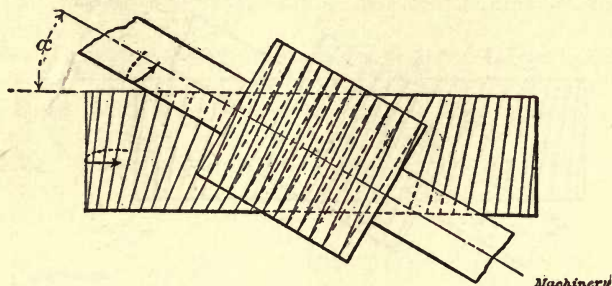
Cutting a Right-hand Spiral Gear with a Right-hand Hob
